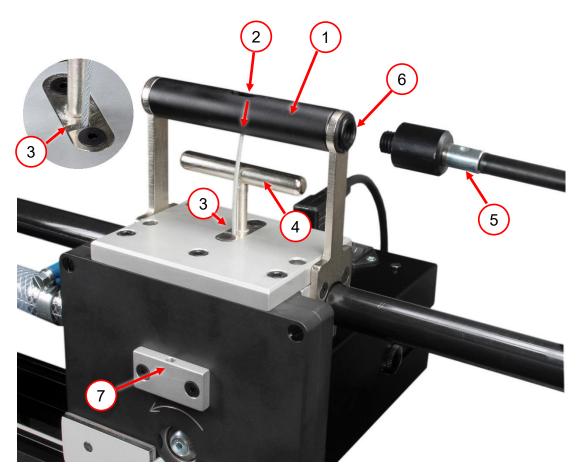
Fitting the VARGA VA 21-15 and VA 31-15 lifting handle, handle, lifting cable and rotary handle extension
